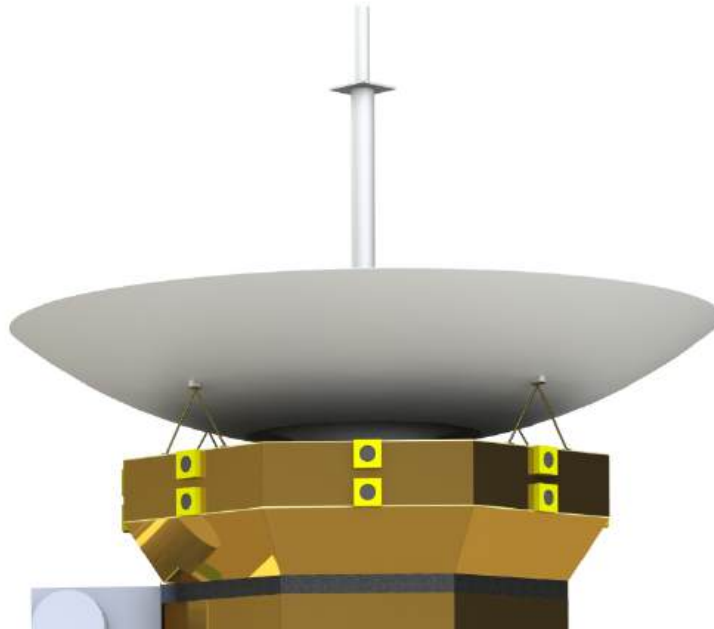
Scuttle MK2: Enhanced view of top assembly and HGA .
